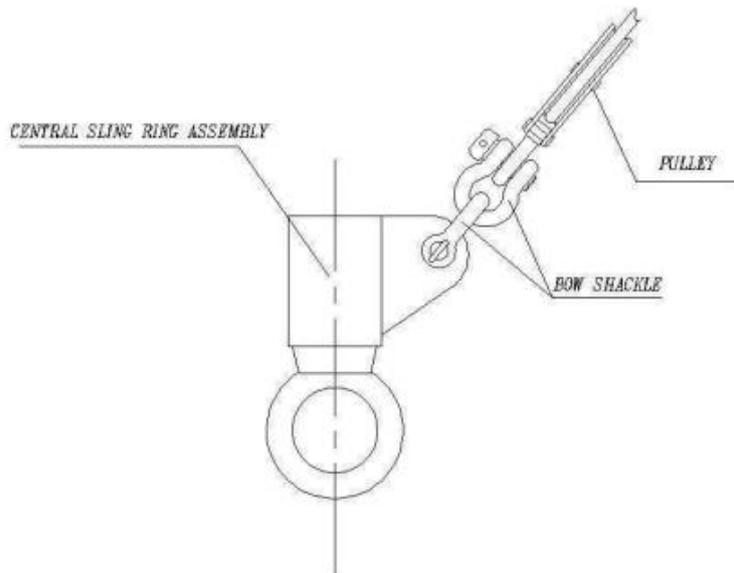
Assembly for Central Sling ring, Bow Shackle, & Pulley The assembly for stainless steel wire rope grips is shown in fig.3.2-8.
